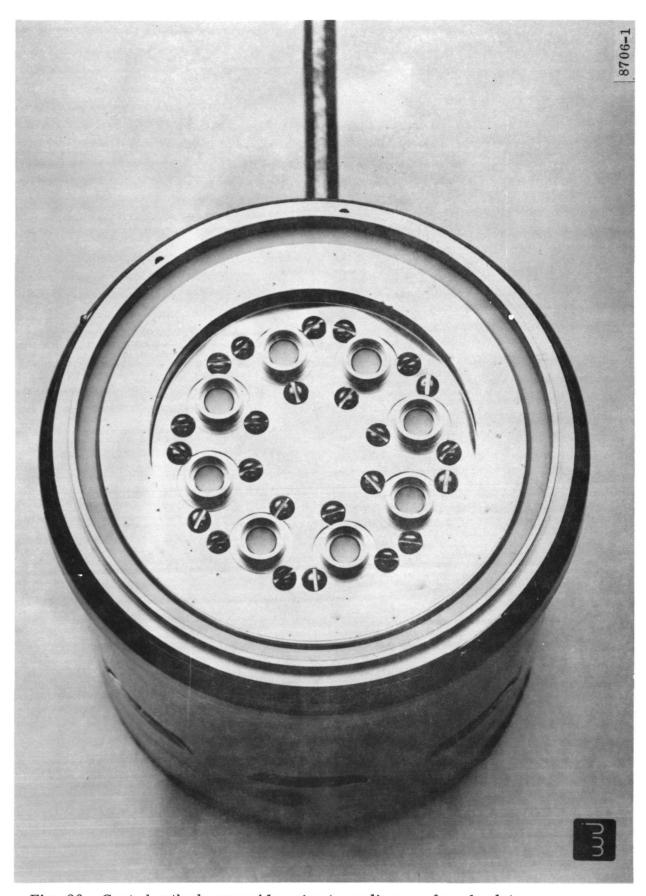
Coated cathode assembly prior to sealing on of anode plate.
